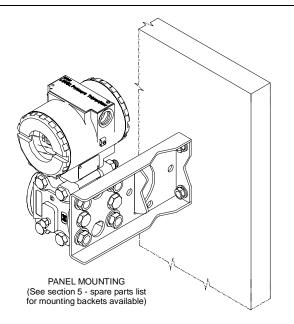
Drawing Mounting of LD301 on the Panel
